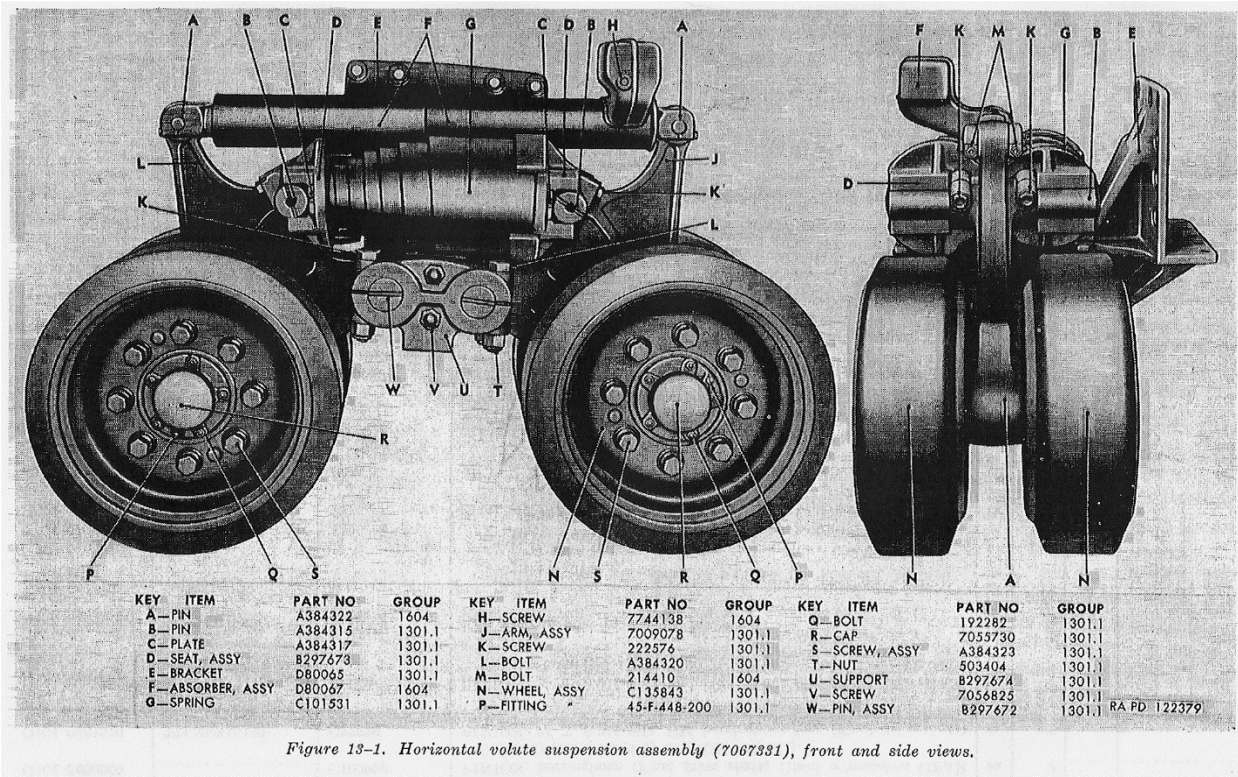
Horizontal volute suspension assembly (7067331), front and side views.
